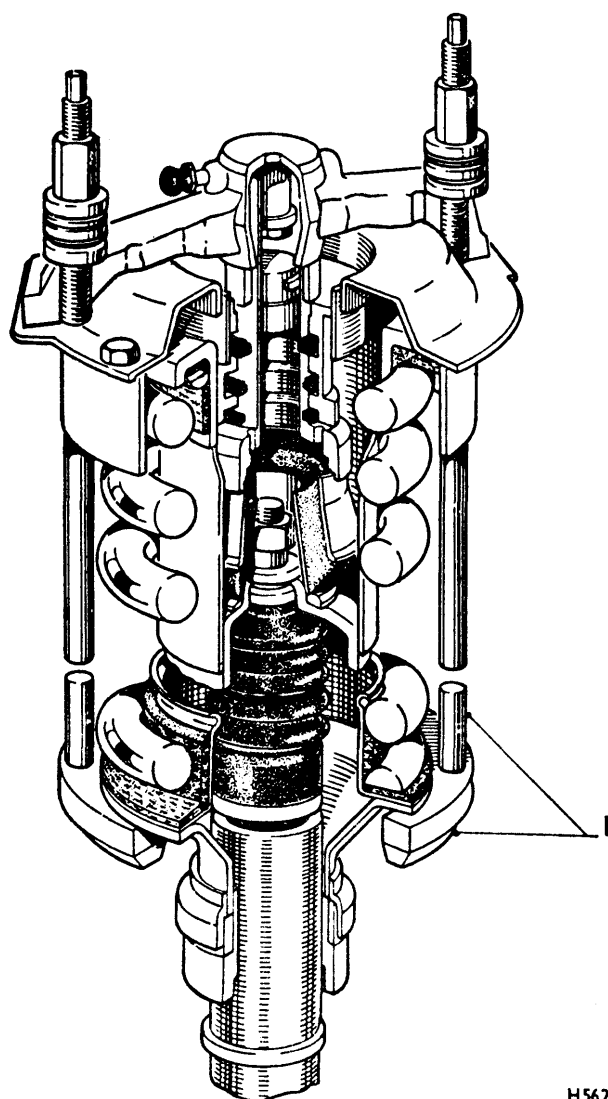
EXPLODED VIEW FRONT ROAD SPRING
